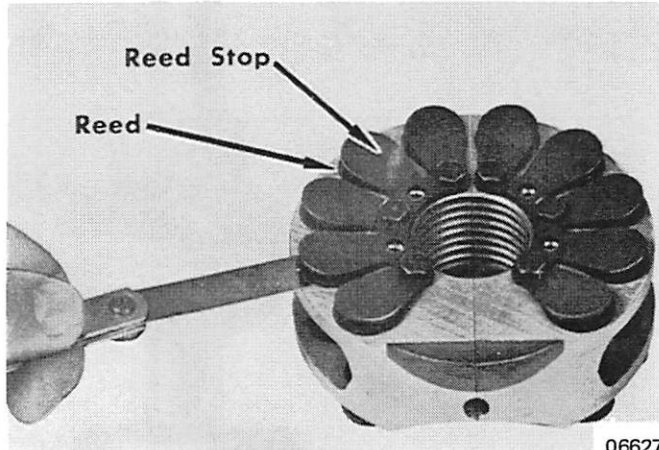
Measuring Reed Valve Opening - 4 and 6-Cylinder
